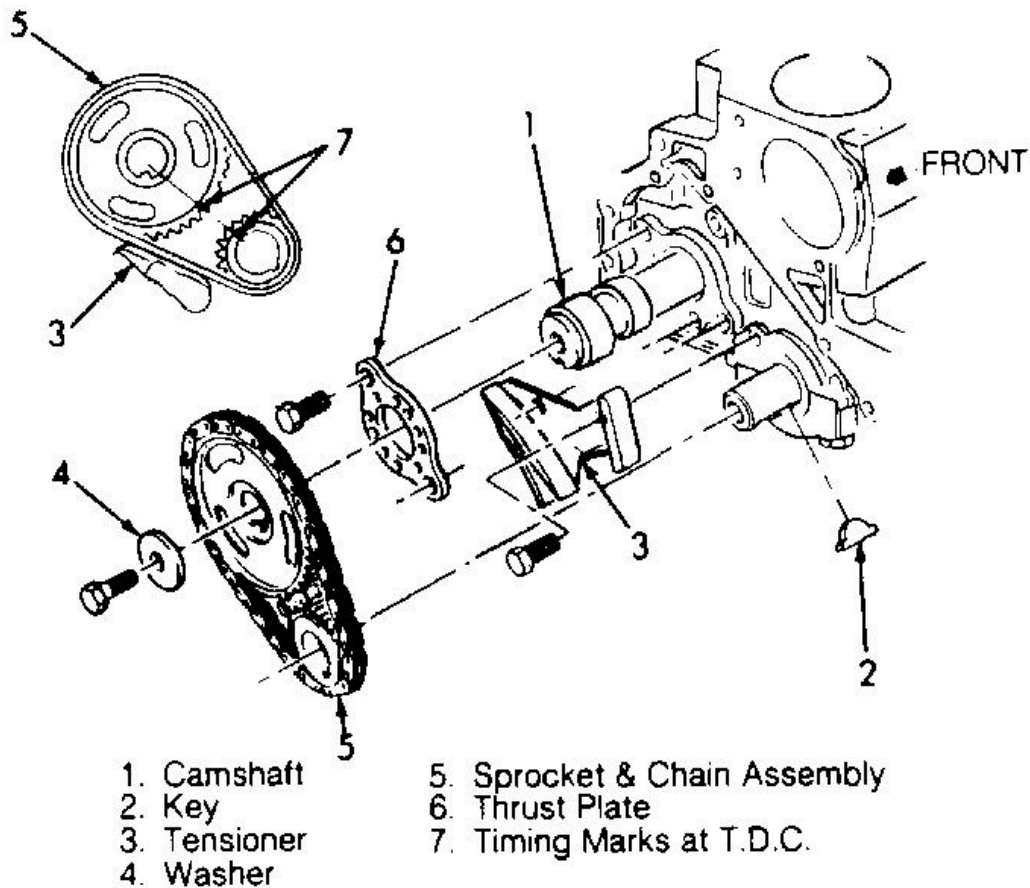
Camshaft & Timing Chain Assembly (VIN U)
